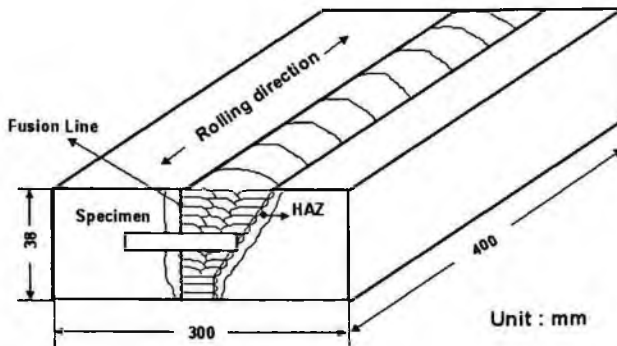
Extraction of Charpy specimen from the multi-passed weld block.
